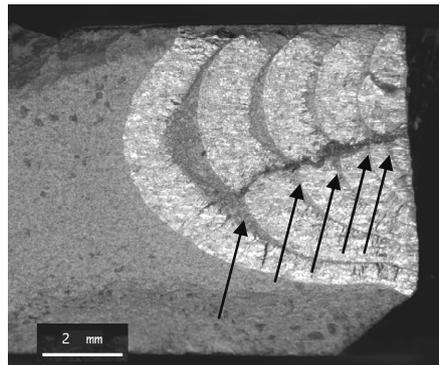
Optical image of a fatigue fracture surface from an AA2024-T8 wing plate: the crack grew from a poorly drilled fastener hole. The fracture surface markings due to the proof test loads are arrowed [38]
